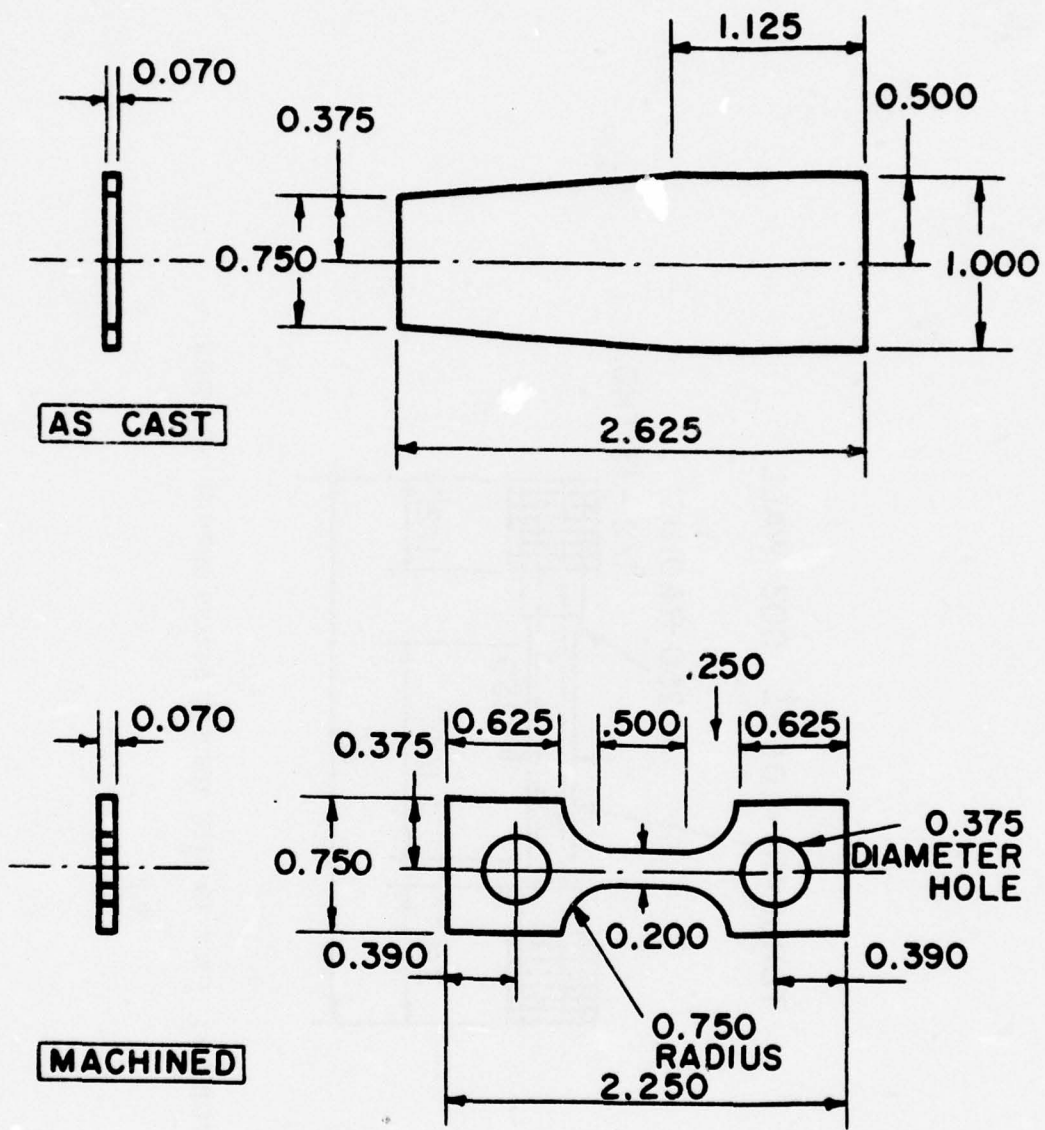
FLAT STRESS RUPTURE SPECIMEN, AS CAST AND MACHINED TO FINAL SHAPE.
